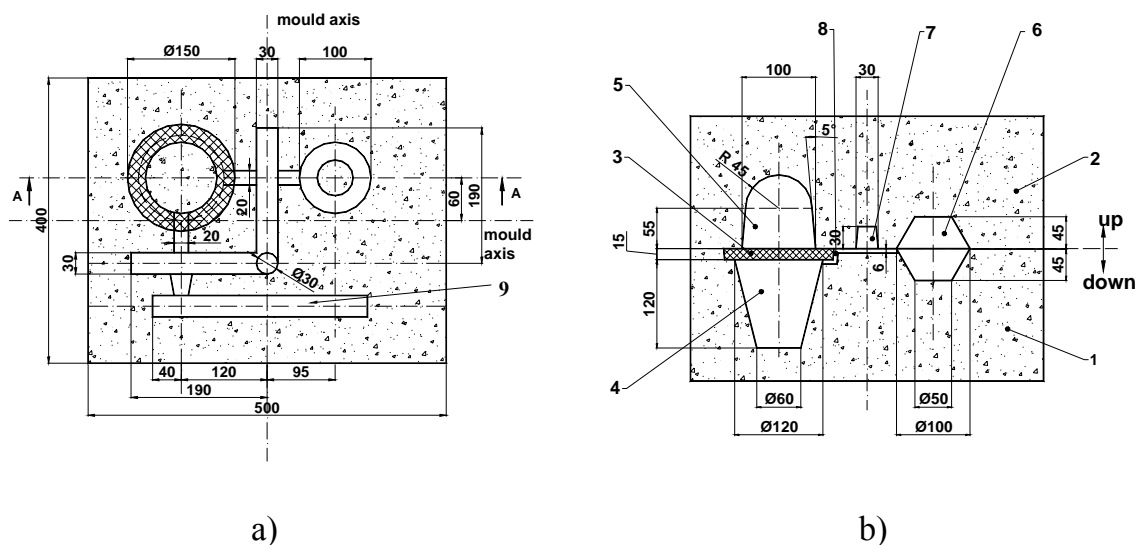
View of the separation plane of the mould, a); Section through mould for casting the samples, b)(section A-A of fig. a)) 1-inferior semi-mould; 2-superior semi-mould; 3 – separation core; 4-sample 1; 5-sample 2; 6 –sample 3; 7-distribution channel; 8-feeder for sample 1, 9-sample 4.
